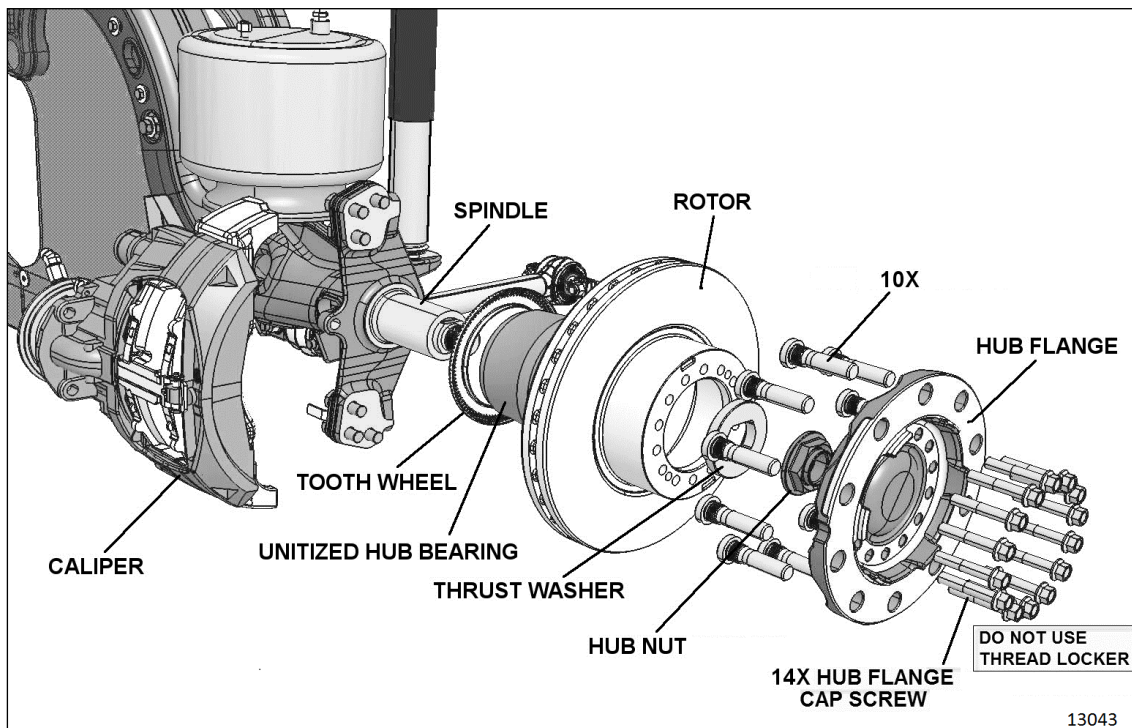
TAG AXLE HUB AND ROTOR ASSEMBLY
